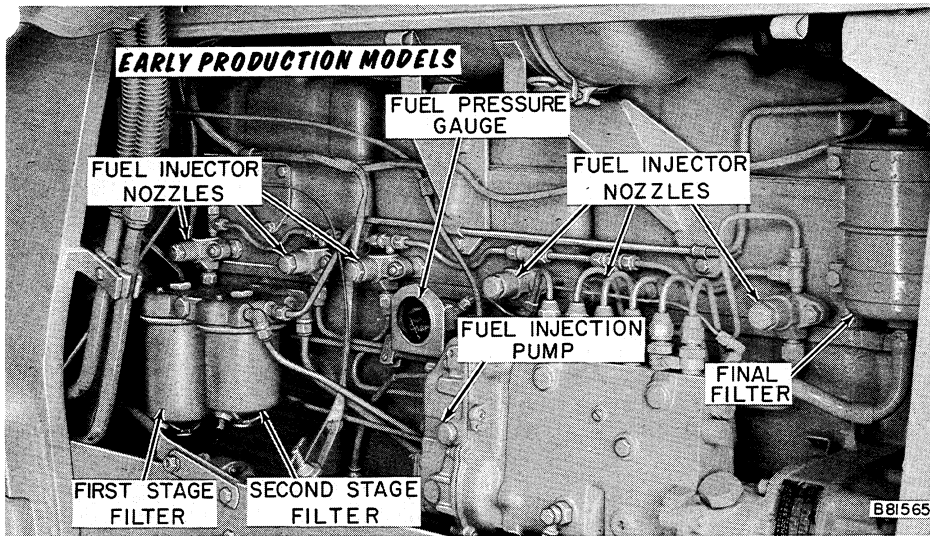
Fuel Filters, Injection Pump, and Nozzles
